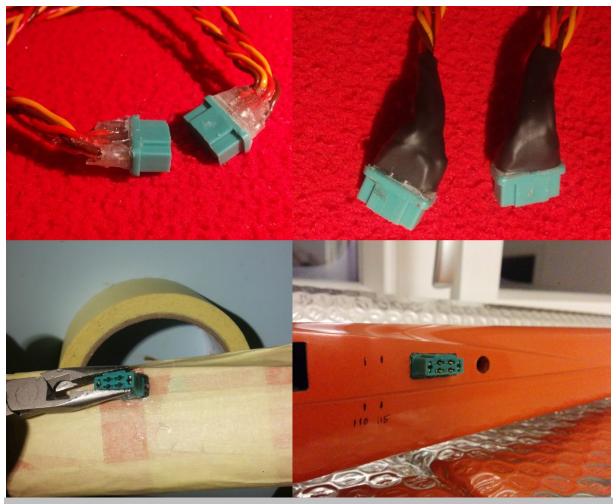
Mount the fuselage sided multiplex plugs: Solder the receiver cables to the plugs as described for the wing sided ones (figure 11). This time seal them with very little epoxy to achieve a short length because there is little space in the fuselage (upper left). Additionally, cover in shrink tubeing for extra protection (upper right). Before you start your work on the fuselage, completely protect it by masking tape. Now adjust the fuselage sided plug opening with a file so that the plug shows a snug fit in there. Use 5 min epoxy to fix the plugs in the fuselage. Smear a thick layer of the epoxy onto each plug and each opening. Wait until the epoxy is semi cured, insert plugs into opening and hold with pliers until epoxy has cured enough to release the plug (lower left). This will take a minute or so if you waited long enough before. Of course you can also prepare a holder template and use this to fix the plug until epoxy is cured. End result (lower right).
